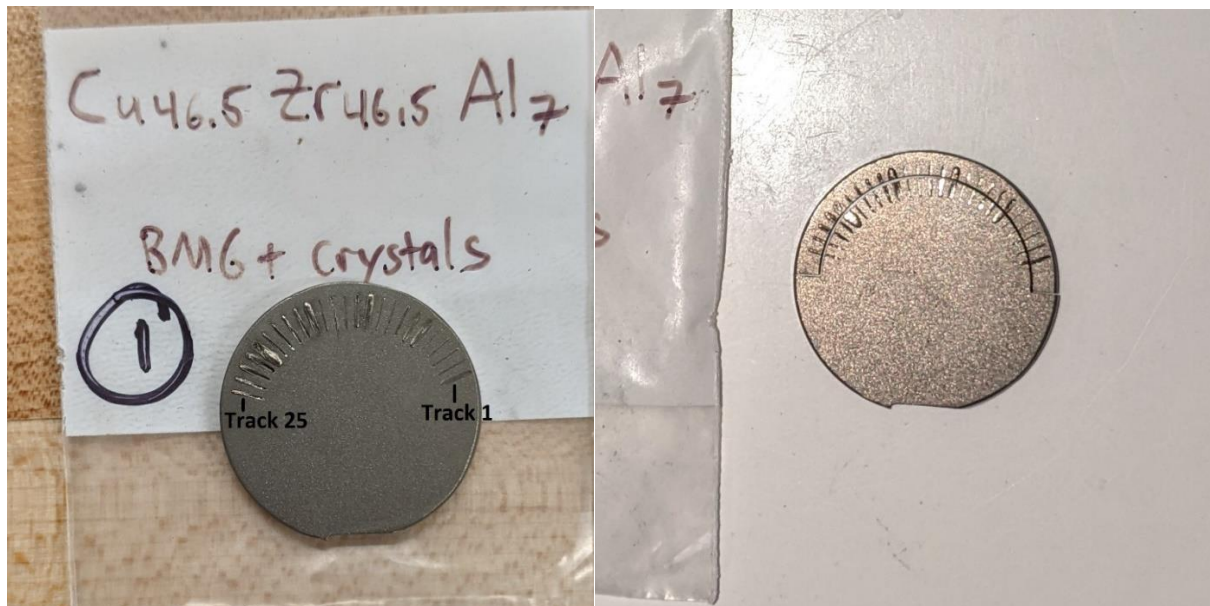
shows the sample after track welding (left) and after wire EDM cutting and cross section polishing (right)
